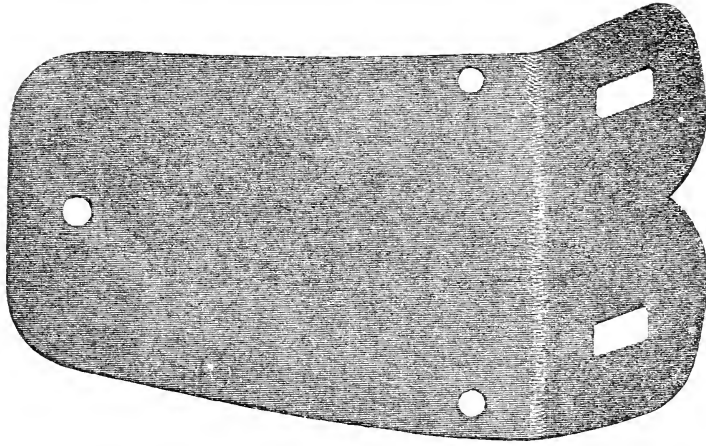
Plates for surgical shoes. Made from 16 gauge sheet iron.
